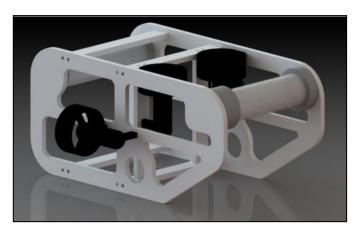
CAD Drawing of the UHMW Frame, Seabotix Thrusters, and Waterproof Canisters.
